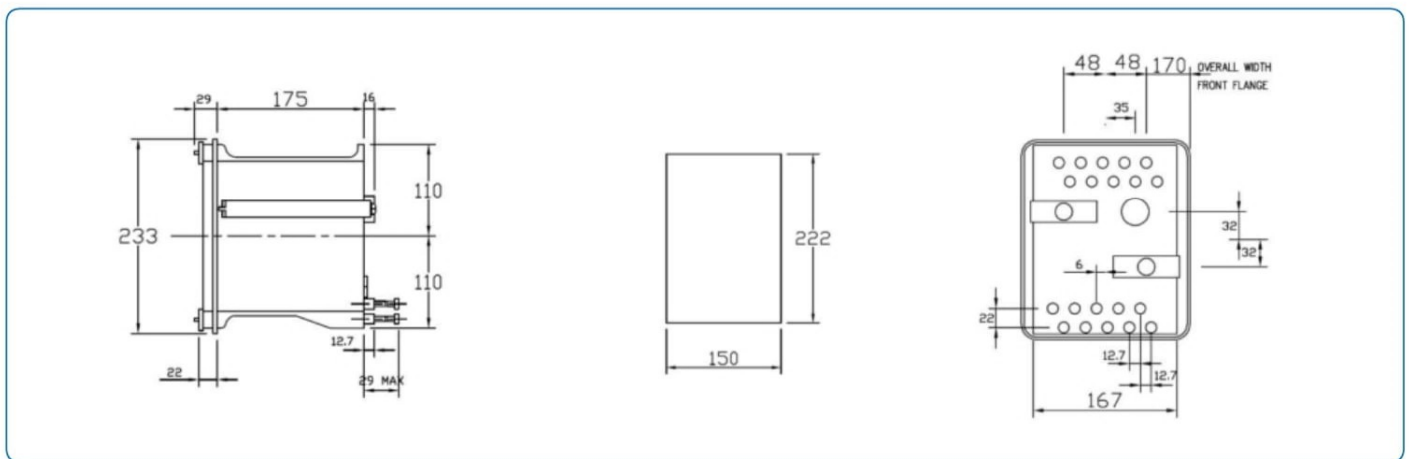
Case and panel cut-out dimensions for case 1D (all dimensions in mm)
